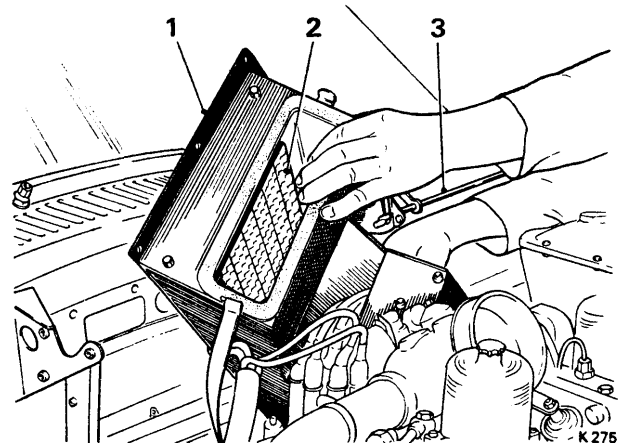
REMOVING THE HEATER BOX AND MATRIX
